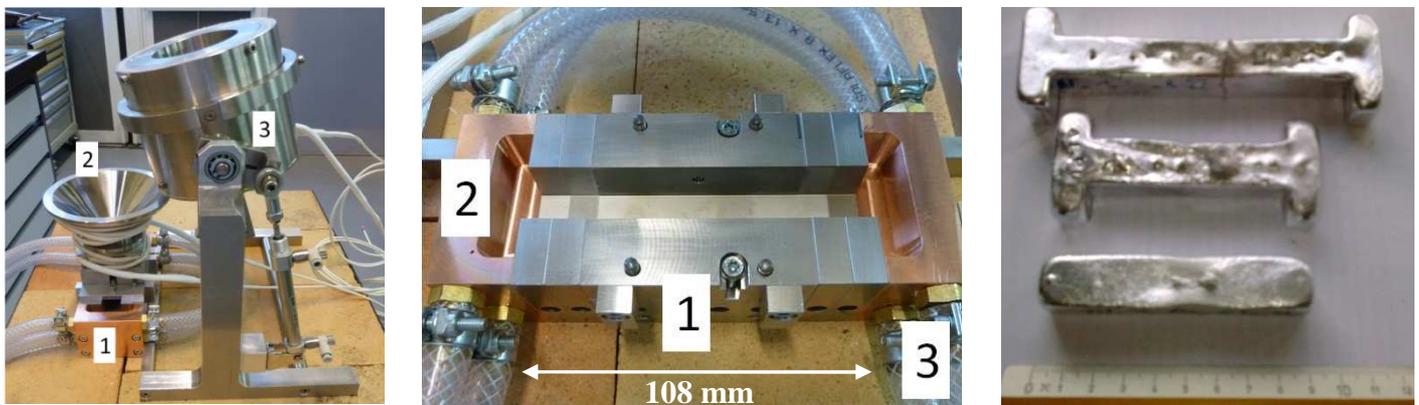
left, casting device (1 - mould, 2 - tundish, 3 - crucible); centre, mould (1 - steel body, 2 - copper chills, 3 - water pipes) and right, castings in DB and FC configurations.
